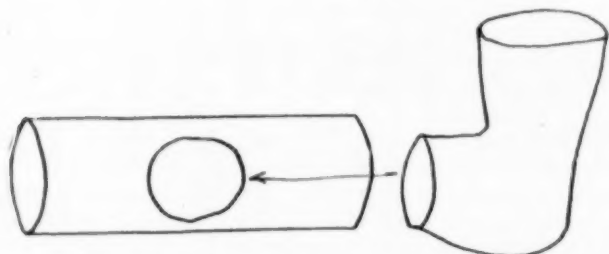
PIN MOLDED IN HORIZONTAL POSITION.
